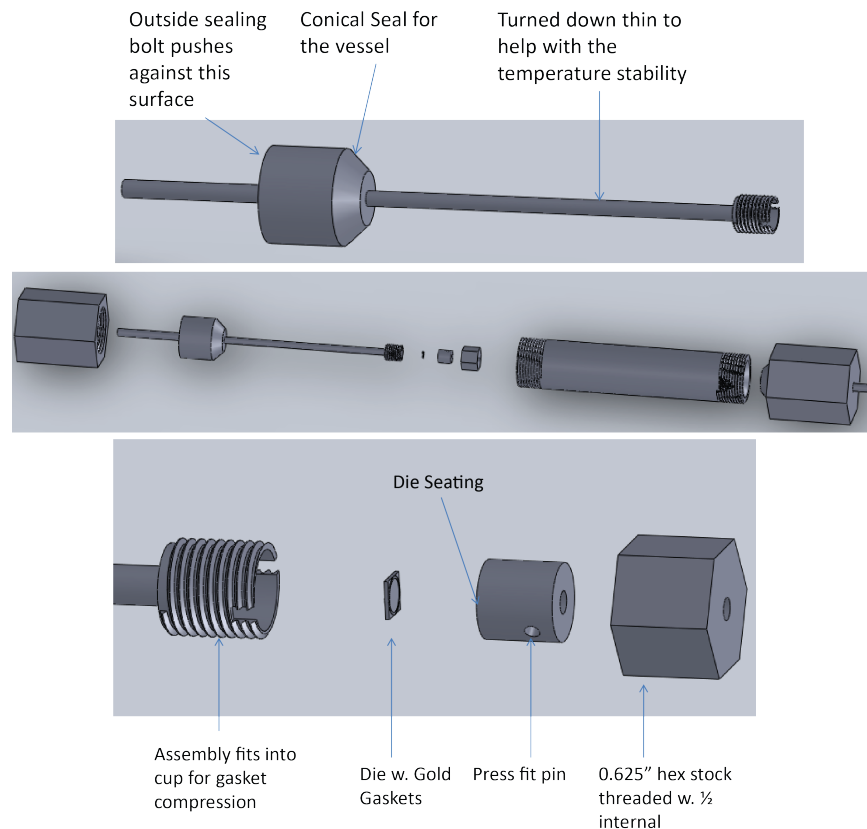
Initial design holds die in place with threads that are exposed to the brine environment.
